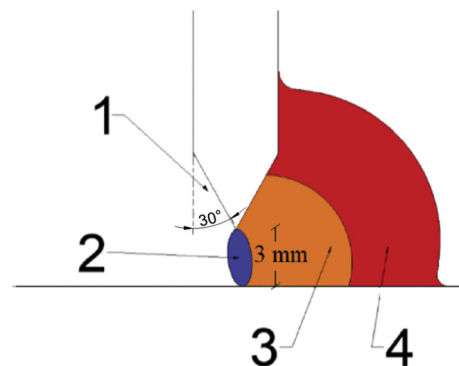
Welding procedures: 1: Machining the stiffener. 2: Tack welding. 3: Root welding. 4: Cap welding.
